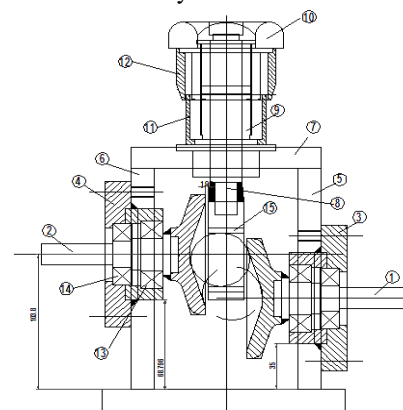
Assembly of Single Ball traction Drive (2 Dimensional View)
